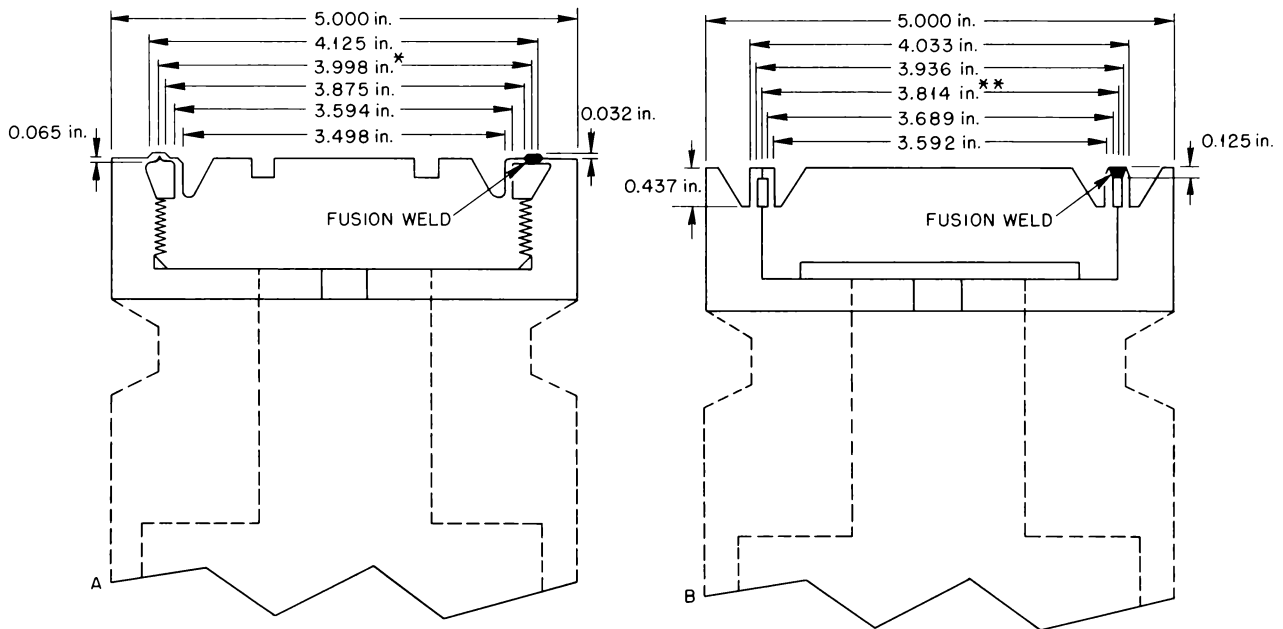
Cross Section of Weld Joint Designs A and B. Solid lines show simulated weld test sample; broken lines show its orientation to the calcining pot neck. * Joint clearance for assembly is 0.001 in.  Male dimension shown; female dimension 3.811 in. for shrink fit.
